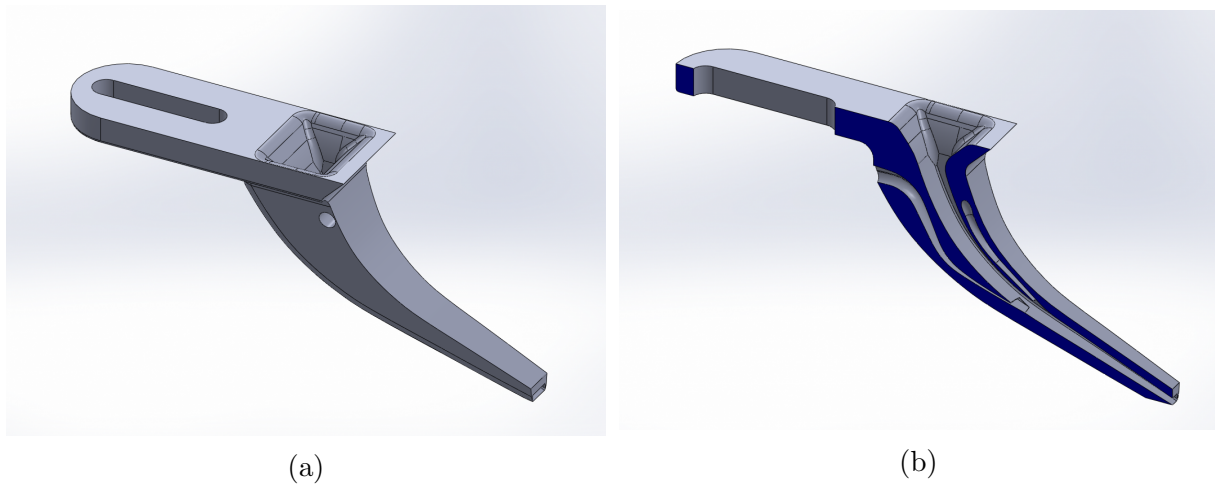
Additive manufacturing feed nozzle version four; (a) full view, showing top air channel inlet (b) section view, showing top and bottom air channels.
